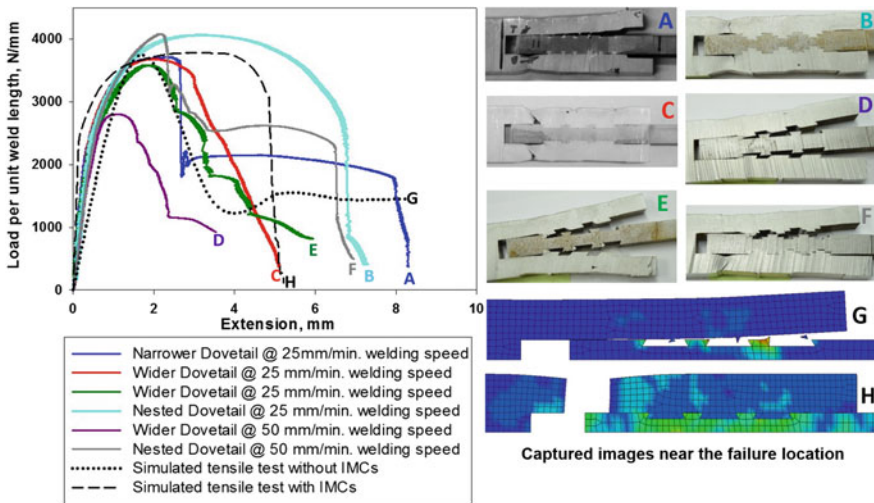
Representative load versus displacement curves of the tensile test on different welding speed and dovetail geometries (*left*). *Right* Tensile samples illustrating the fracture pattern
